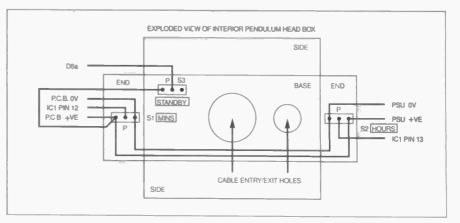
Switch mounting and wiring details for the pendulum head box.
